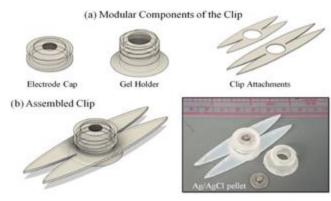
Components of the Sevo electrode prototype. (a) CAD drawings of the modular components of the electrode and (b) CAD drawing of the assembled clip shown alongside a photograph of the 3D printed prototype
